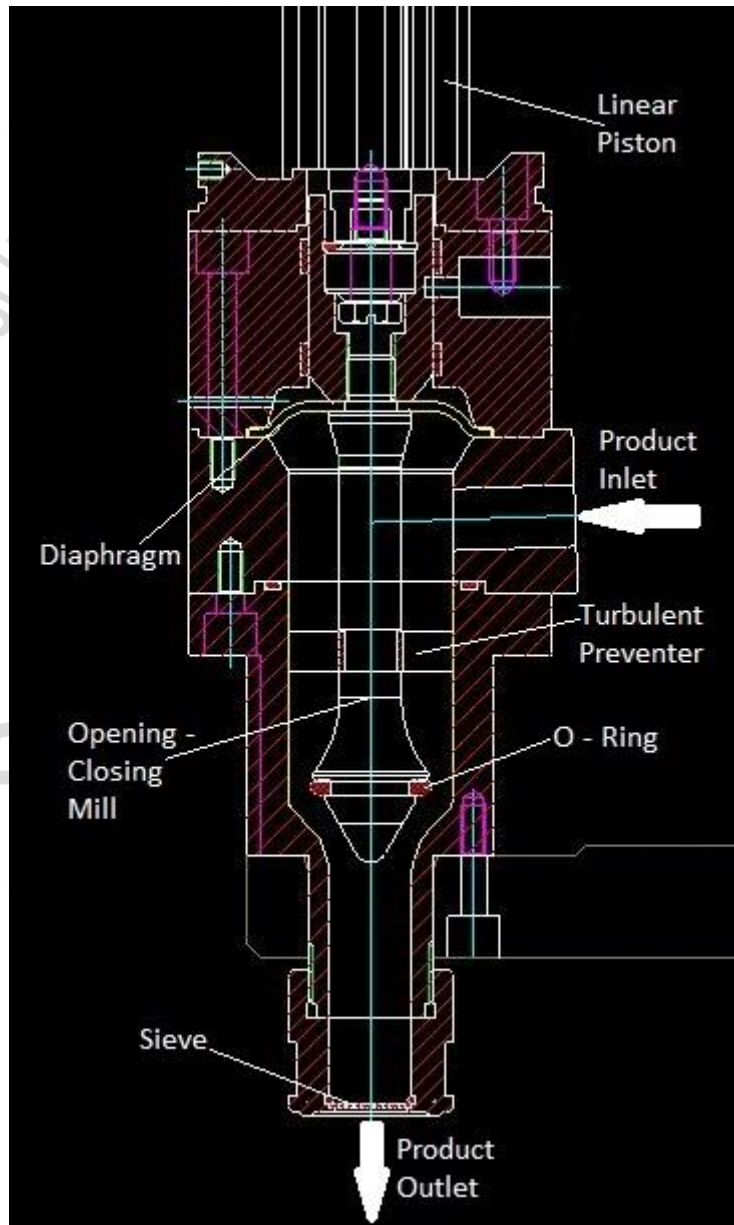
Mechanical Design of Filling Valve With Stepper Motor
